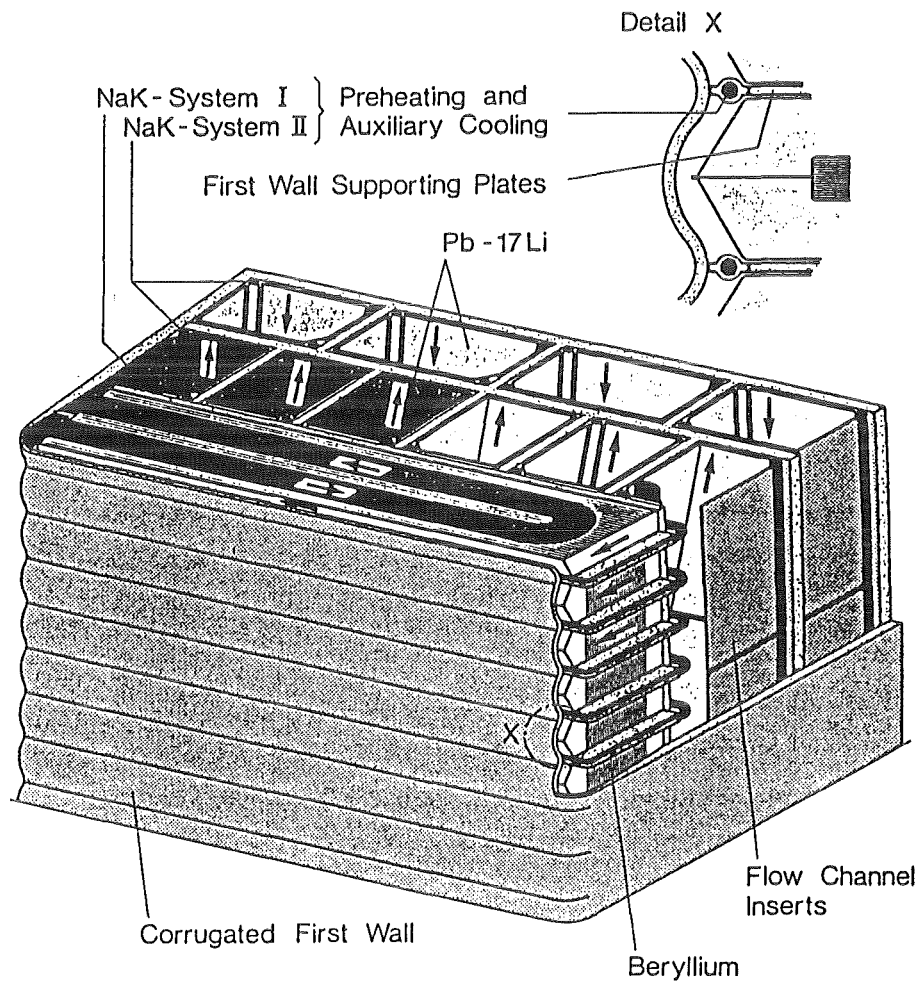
Cross section of a self-cooled Pb-17Li blanket segment for DEMO
